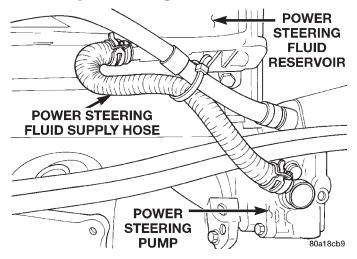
Power Steering Fluid Supply Hose 2.0 And 2.4 Liter Engine
